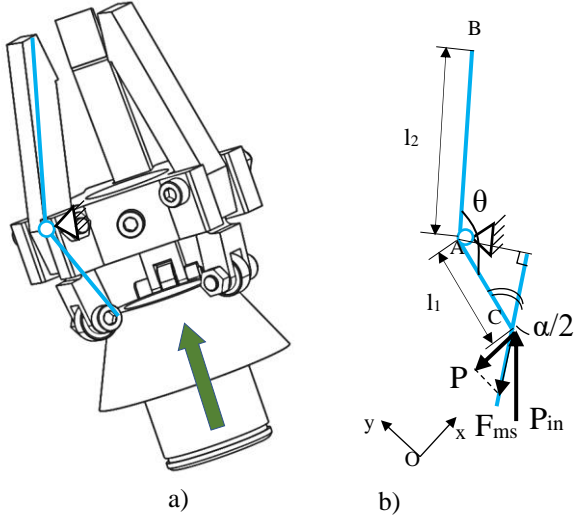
The 3-claw gripper: a) 3D design; b) Kinematic diagram with design parameters.
